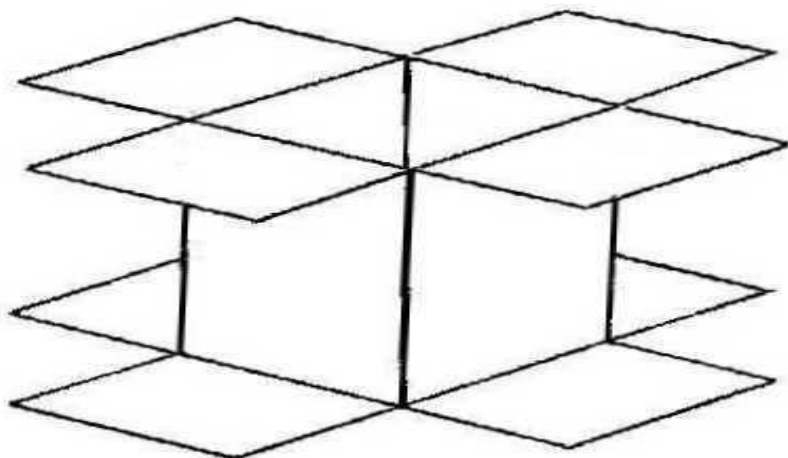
A rough drawing of the “square tube” formed out of matching vinyl showing the folded over ends which will be glued to the top and bottom of the roof cover.
